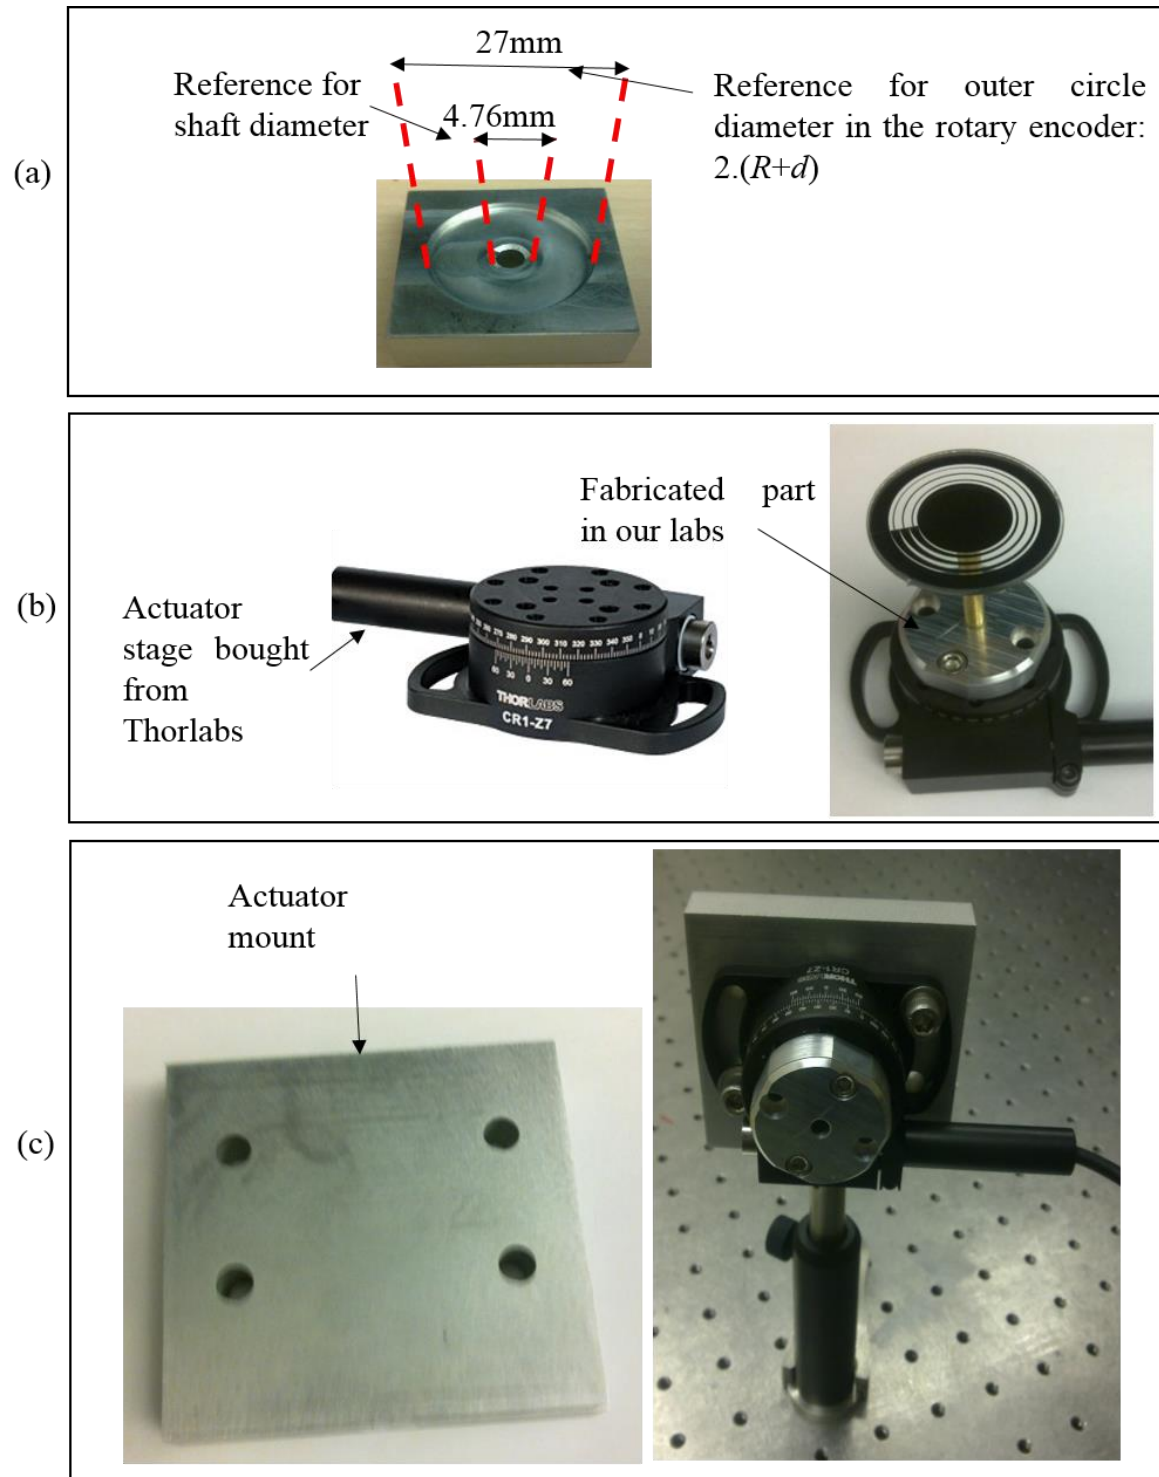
Primary mechanical setup, (a) Alignment part to find the center of rotary encoder while its installation on the shaft, (b) to install the rotary encoder on the motor stage bought from Thorlabs a mechanical piece was fabricated, and (c) installation of the actuator on the optical table.
